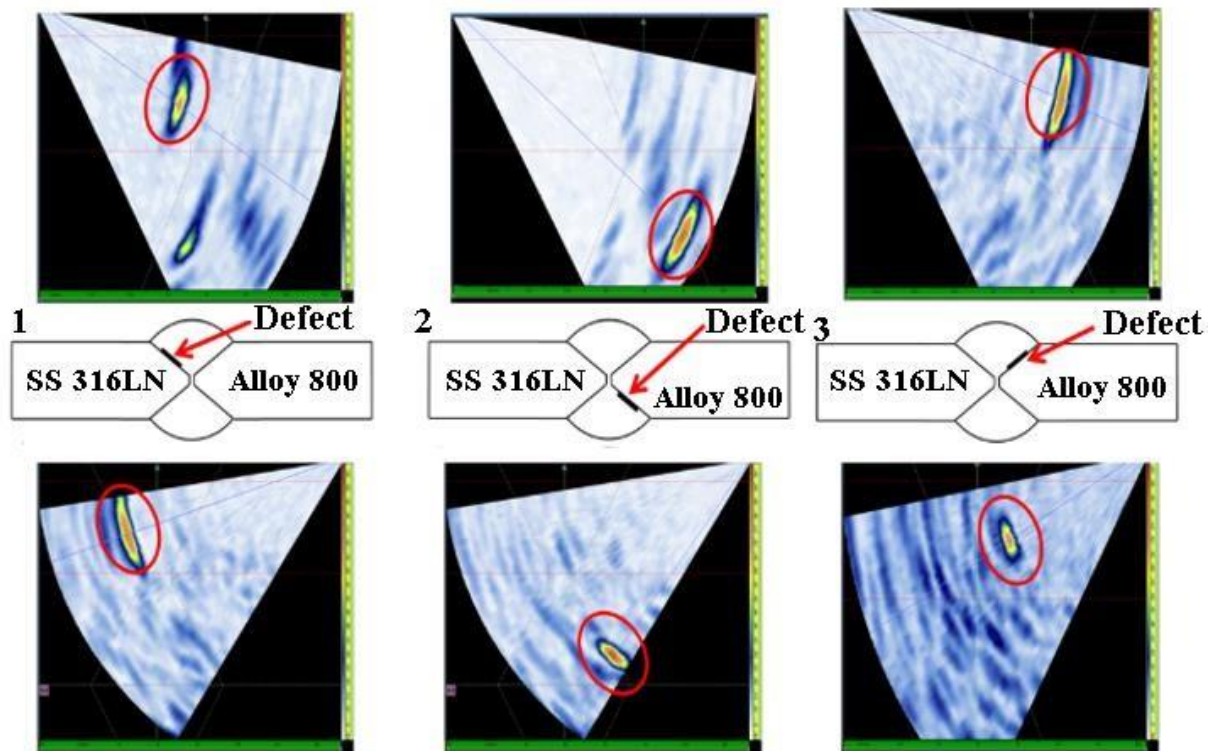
The SMAW weld sample was scanned (S-scan) from the SS 316LN side (top) and the Alloy 800 side (bottom) (Kumar et al, 2022)
